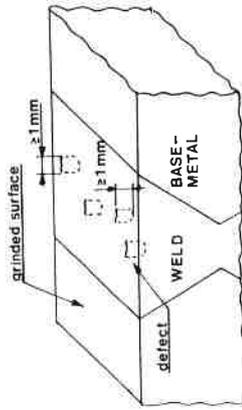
A schematic view of the location and size of the defects in the weld.
